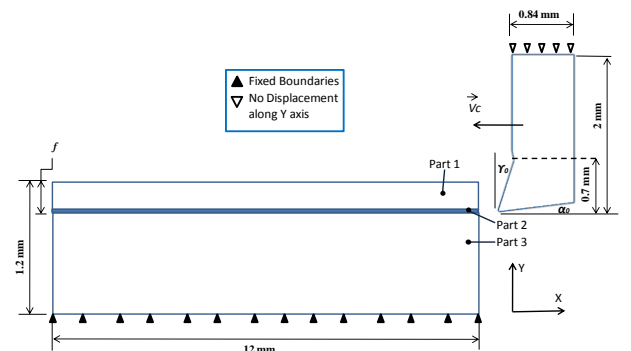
Workpiece and Tool geometries. V_c = Cutting Velocity, γ_0 = Rake angle, α_0 = Clearance angle, f = Chip Thickness.
